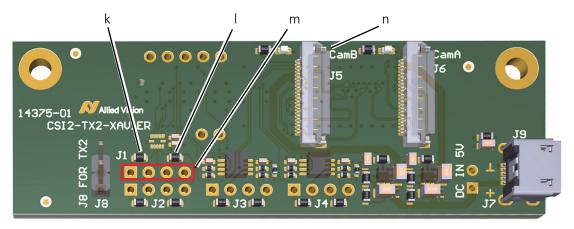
Desoldering resistors and soldering a pin header for Camera B
